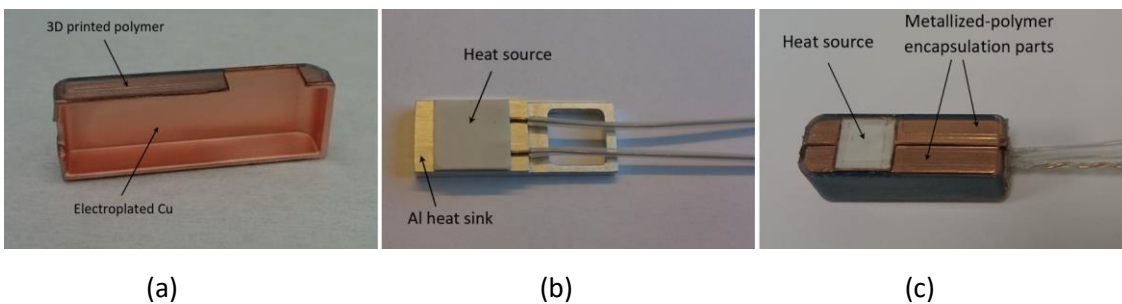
(a) Cu electroplated polymer part; (b) Heat source (resistive heating element) bonded to an Al heat sink; (c) Test sample after assembly.
